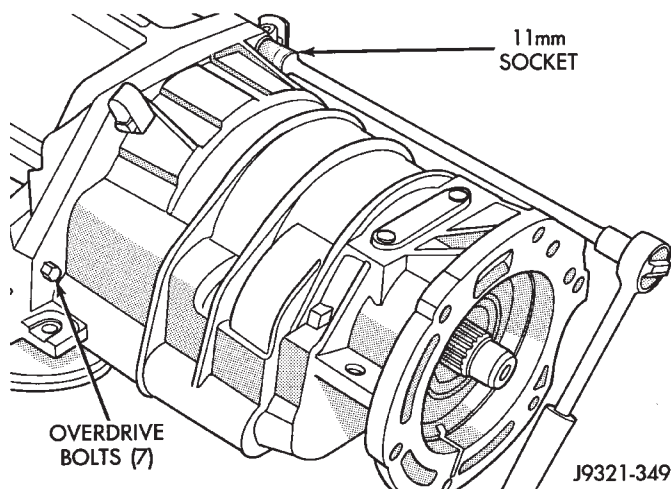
Removing/Installing Overdrive Unit Attaching Bolts
